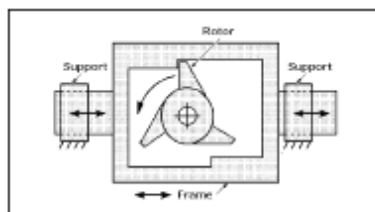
Rotary-to-linear mechanism converts the uniform rotation of the 3 tooth rotor into a reciprocating motion of the frame and supporting bars.
